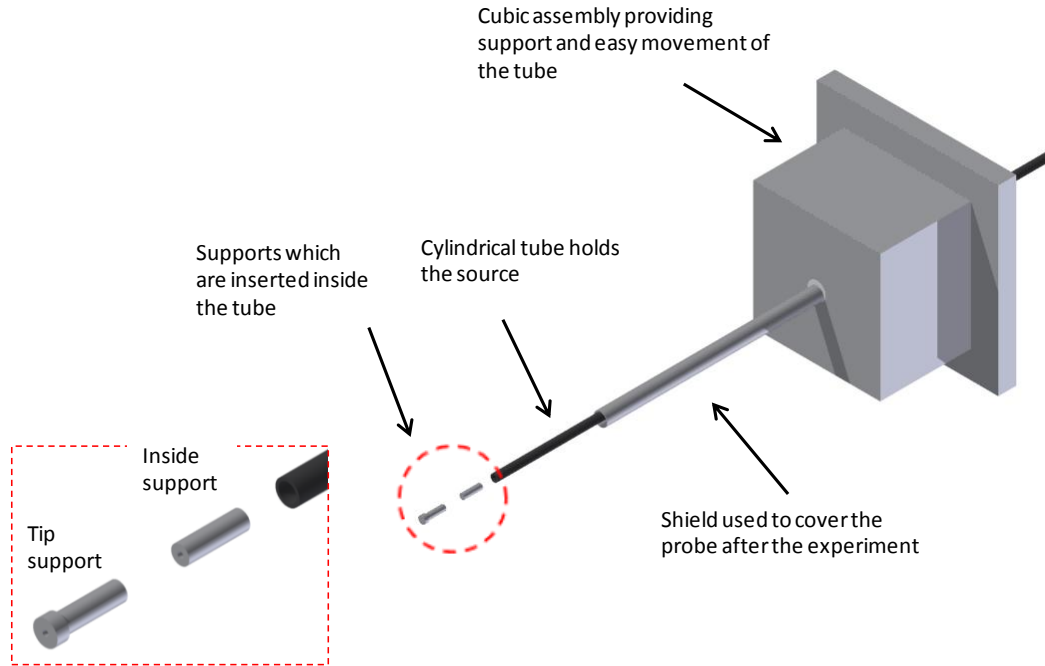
Schematic of probe holder, cubic assembly, tube, supports, and the shield.
